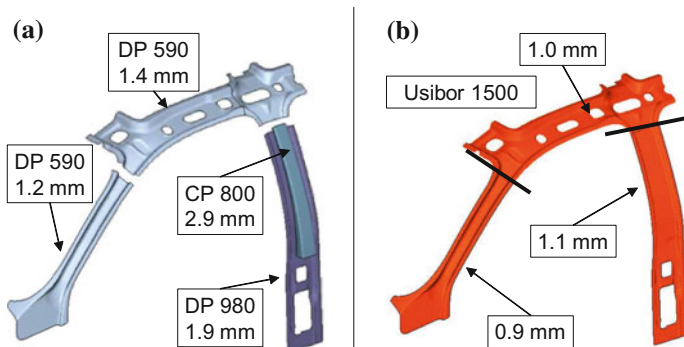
“T-bone”, inner reinforcement design: a cold stamped and spot welded four pieces, b tailor welded (laser welded) blank for hot stamping (re-created after [35])
